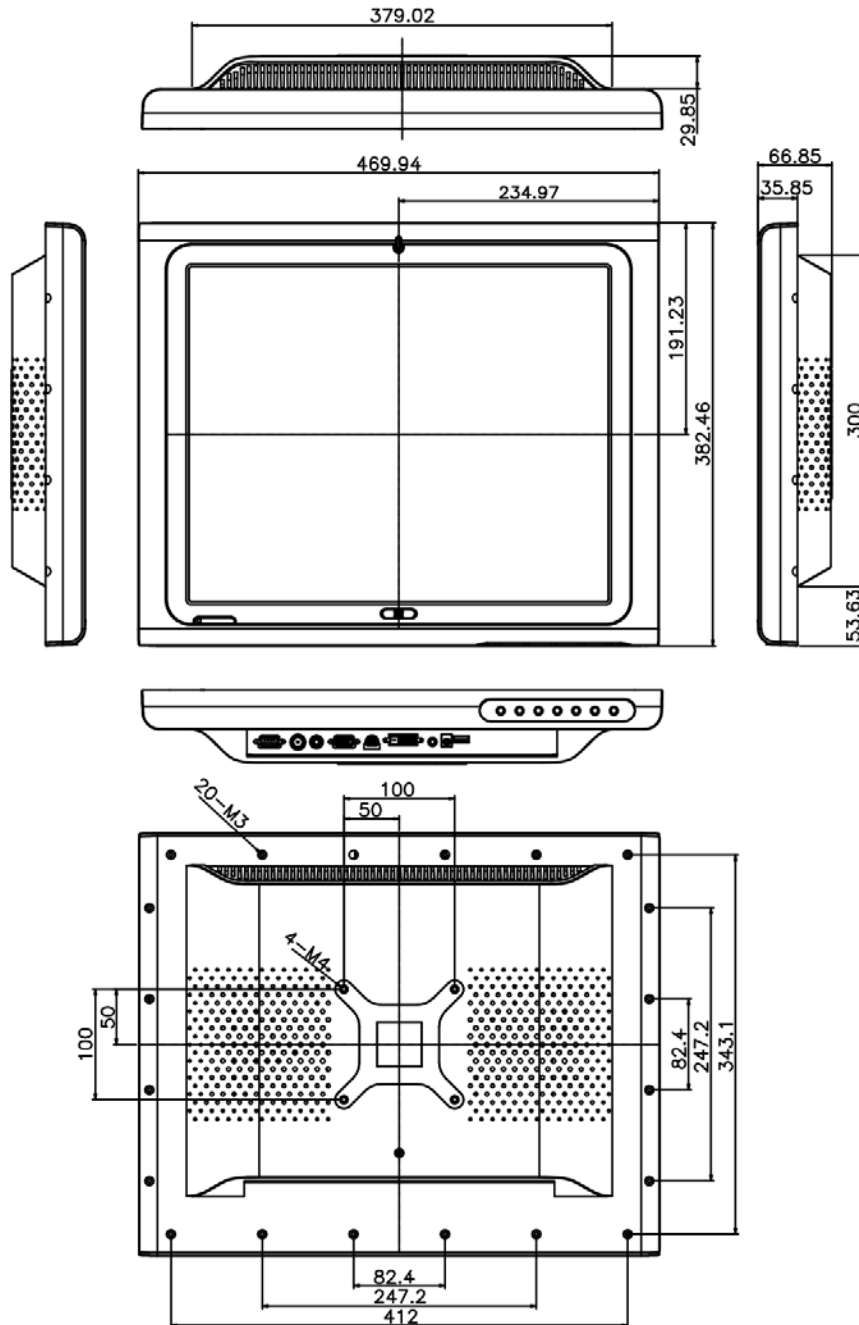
iSignager-LCD-17S Physical Dimensions (millimeters)
